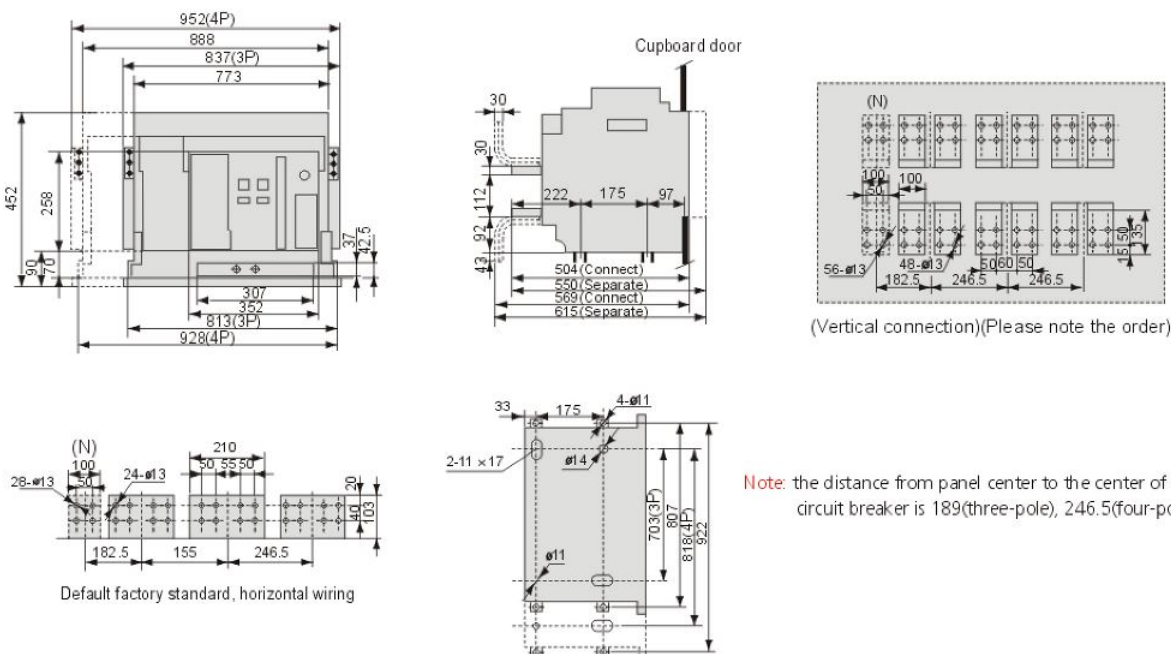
Overall and installation dimension of (ASW1-6300, 6300/4 In=4000A, 5000A) drawer type circuit breakers
